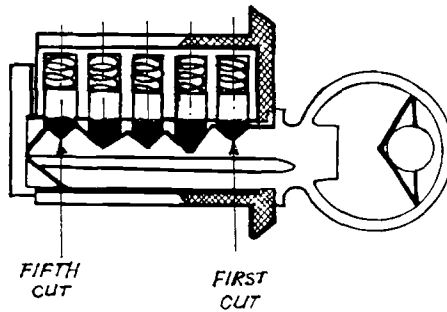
View of a pin tumbler lock with the properly cut key inserted into the keyway, noting the number one and five cut on the key.
